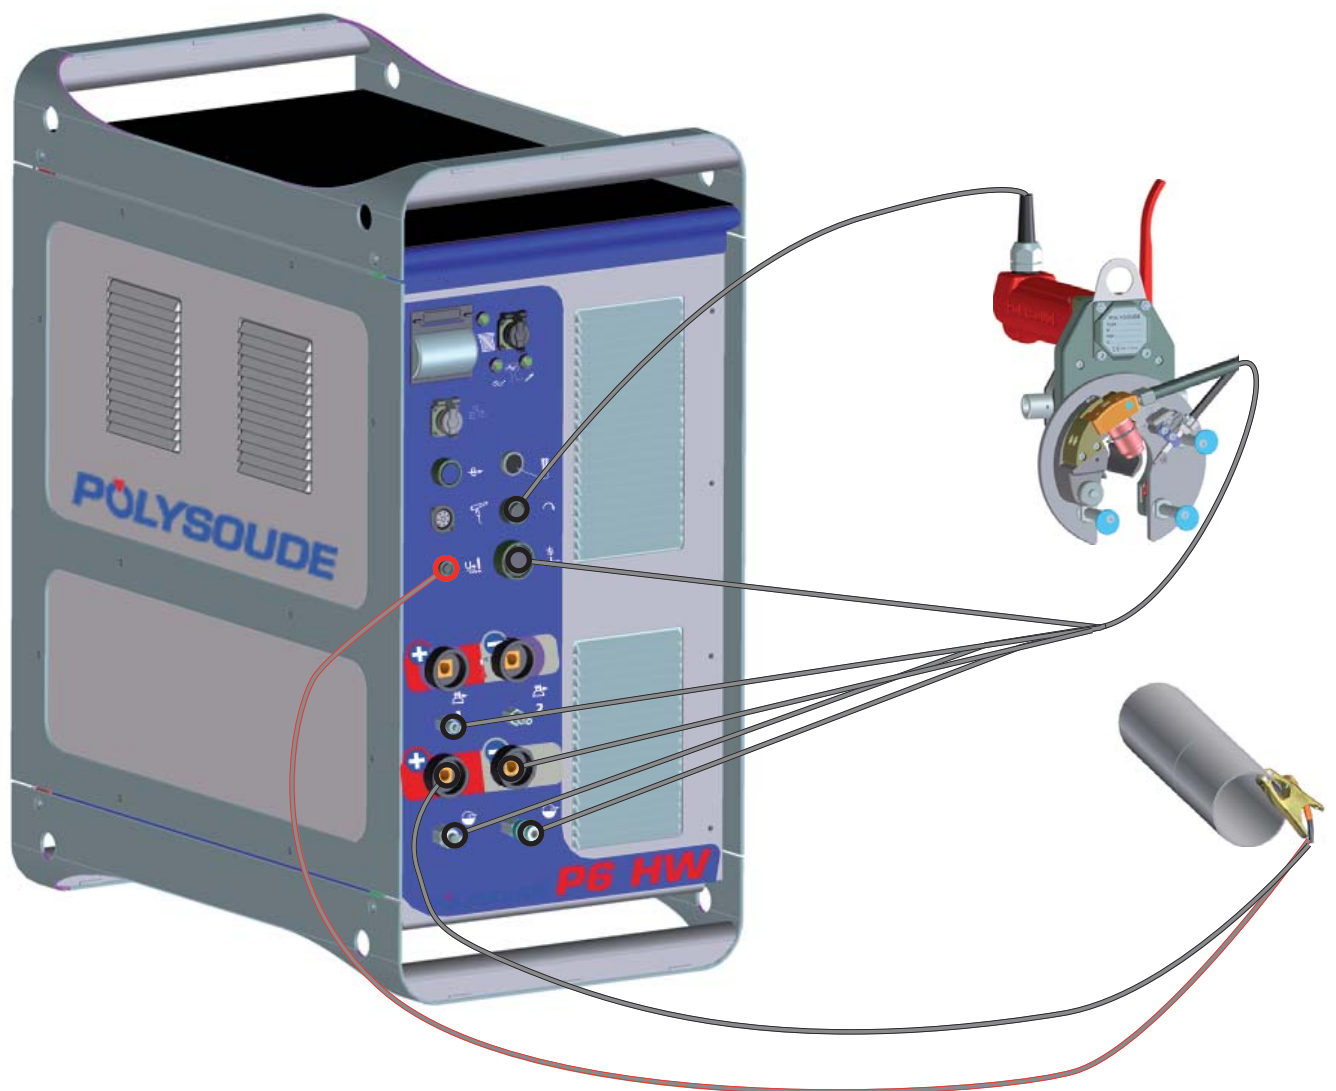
Connection of an open welding head of the MU type or a tube/tube sheet welding head of the type TS or TP
